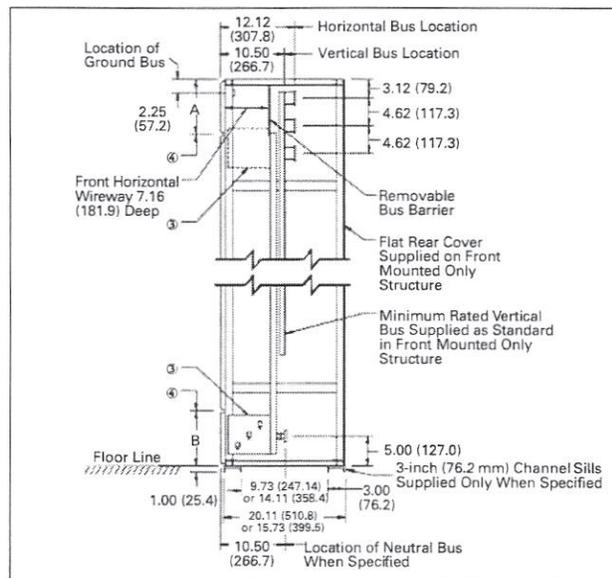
Side View A — Front Mounted Only in Inches (mm)
